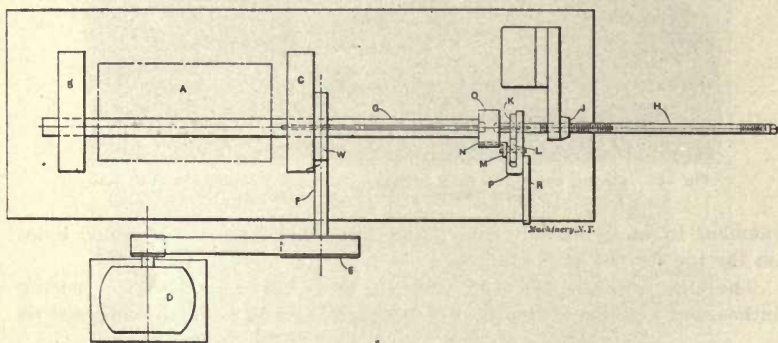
Outline of Arrangement of the Drive and Feed of the Boring Bar of the Jig in Fig. 131
